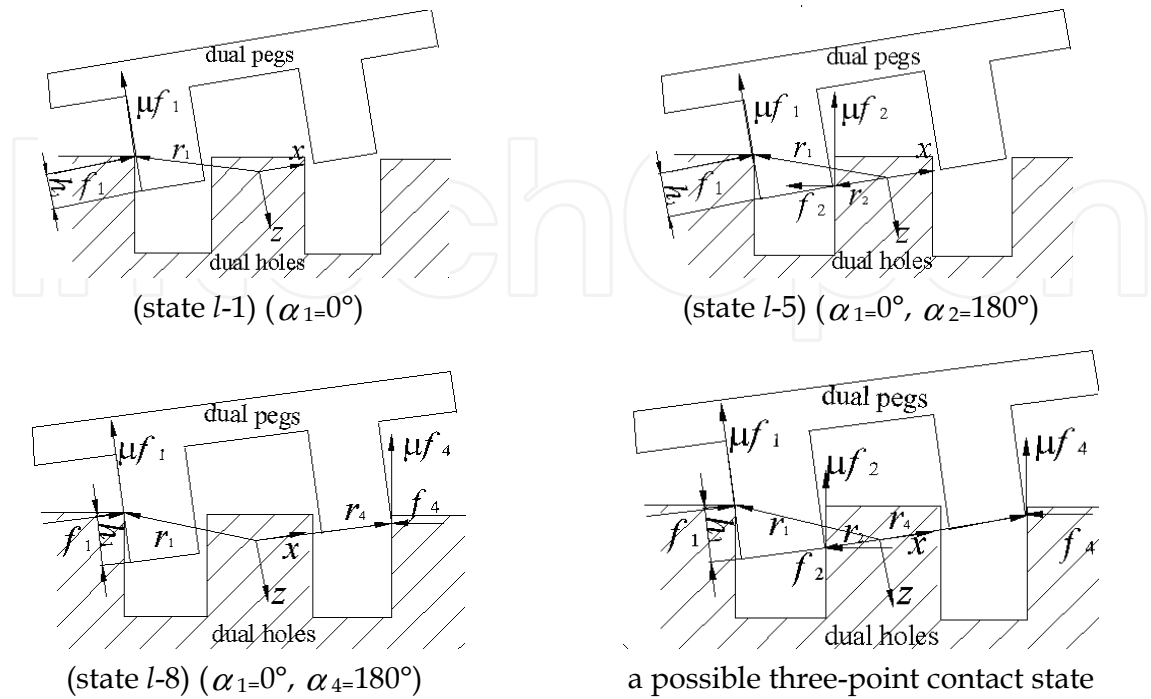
Assembly states of a dual peg-in-hole in three dimensions.
